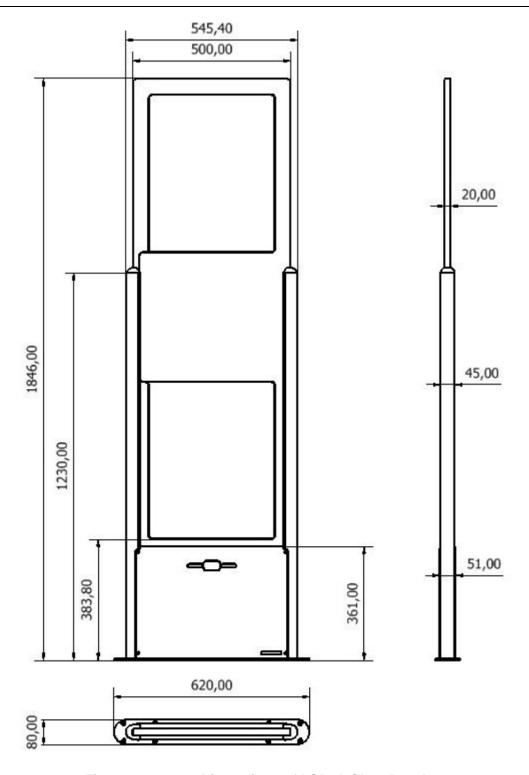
Outer Dimensions of LSP3A Clear Panel
